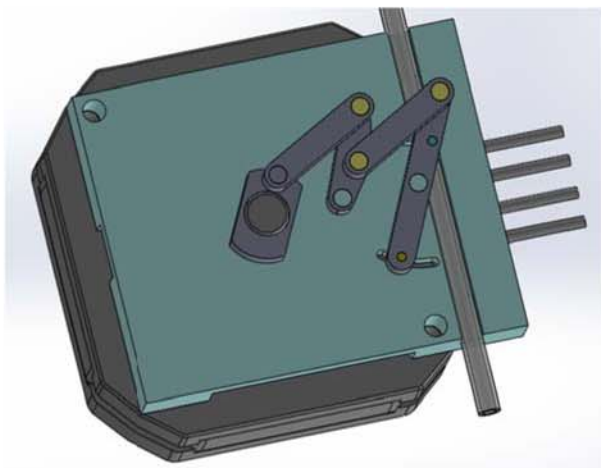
Clamp: preliminary CAD design, mechanism shown in closed configuration
